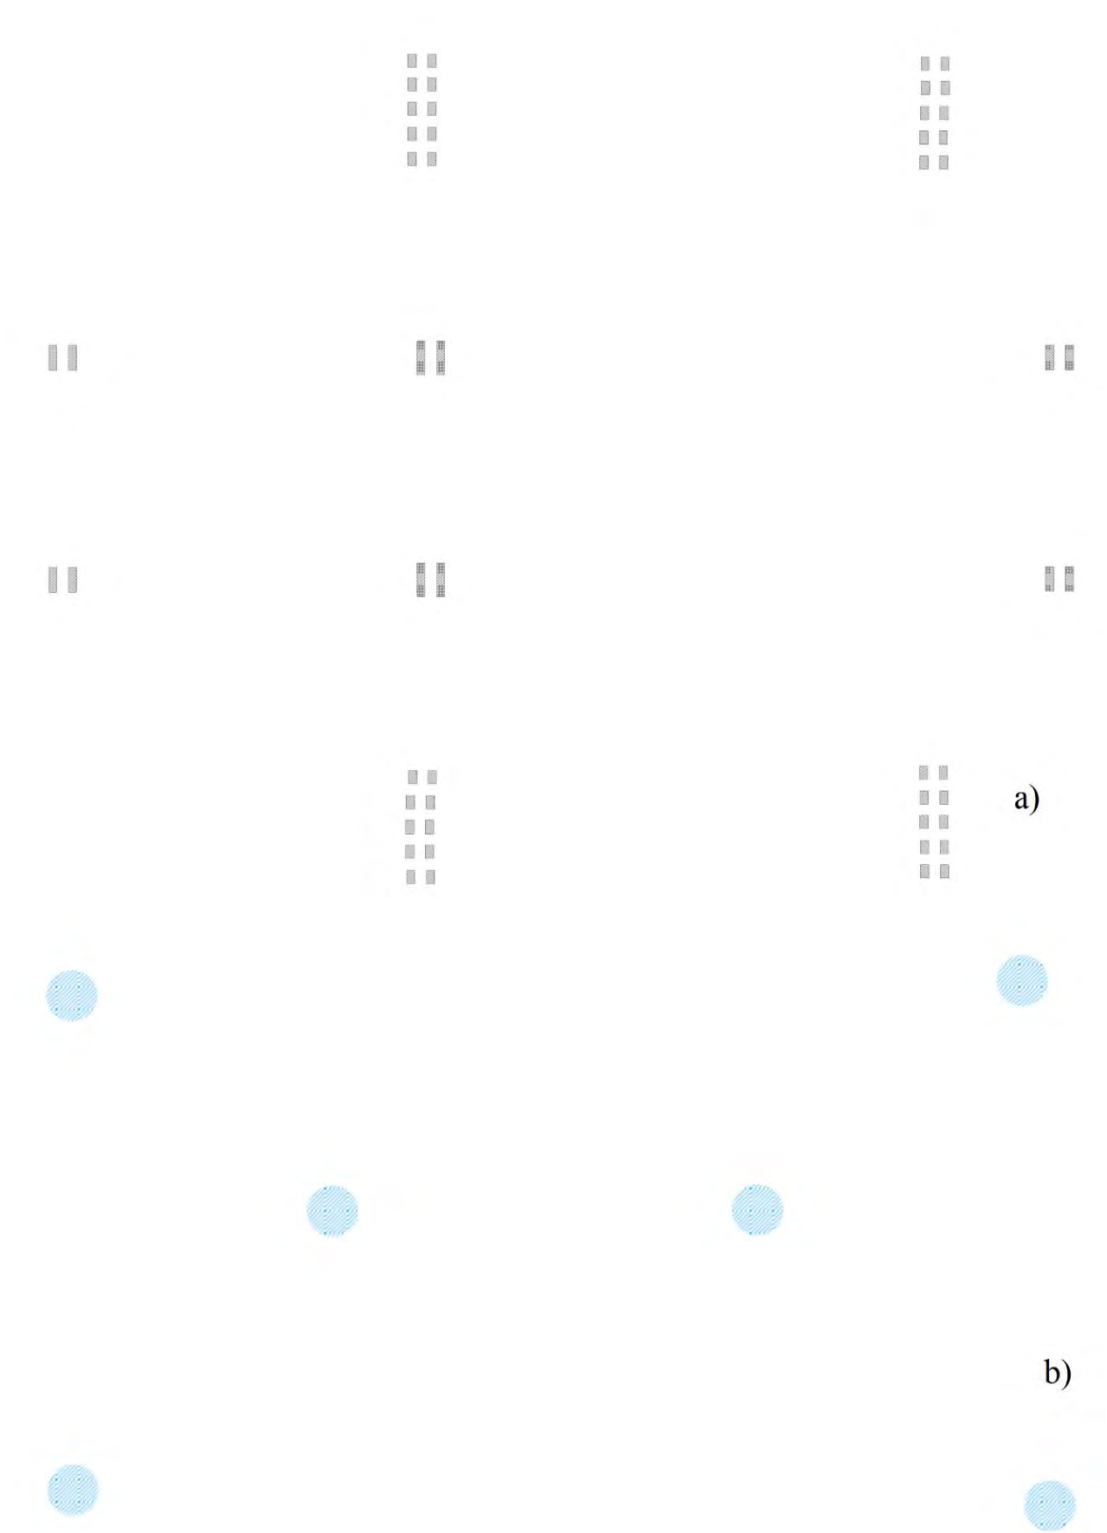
Doherty PA final layout a) Pastemask layer b) PCB screws layer
